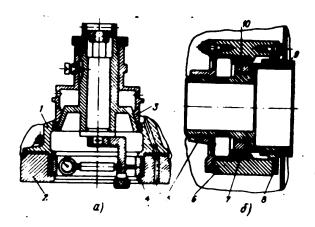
Devices (a and b) for Checking Coaxiality of Labyrinth Seals
